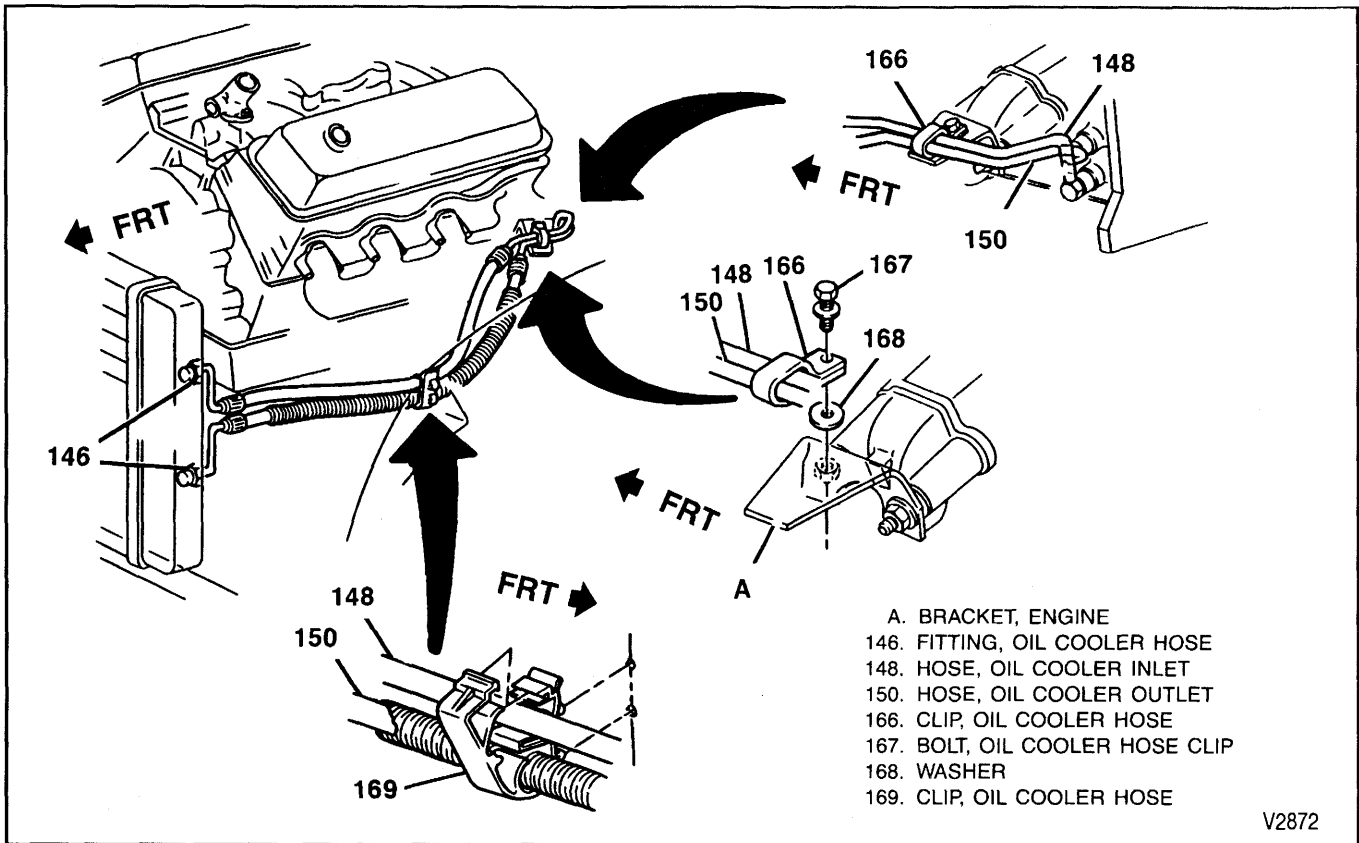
Engine Oil Cooler Lines and Components (Chassis Cab Diesel)
